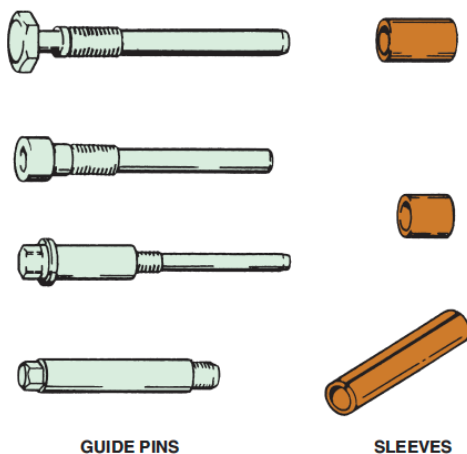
Metal guide pins and sleeves are used to retain and locate floating calipers.
